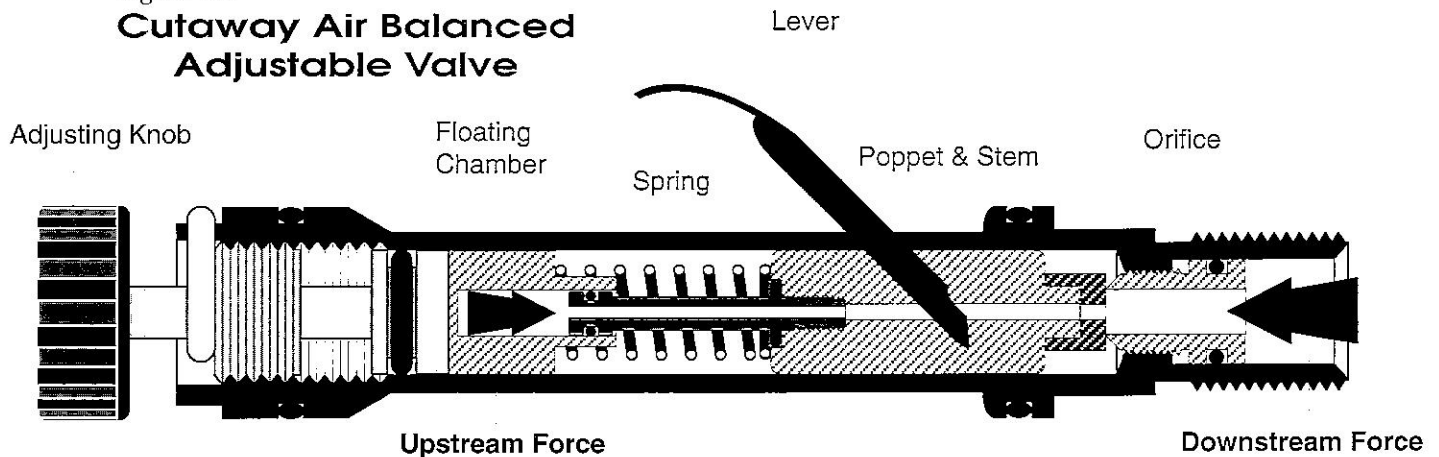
shows the complete cutaway air balanced valve assembly installed in the air barrel. Let's trace the forces that control poppet movement to discover how air balancing works.
